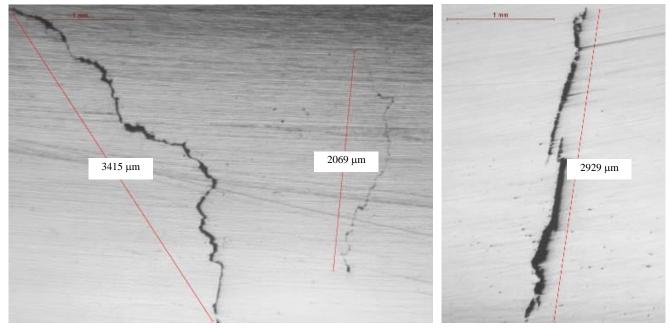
Appearance of micro-cracks in specimen 2 weld (PIVA 25/20 B).
